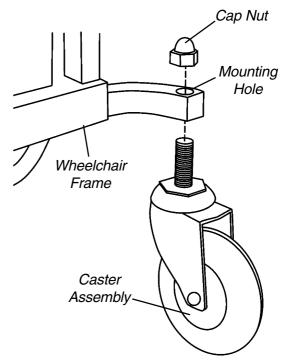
REPLACING THE FRONT/REAR CASTER ASSEMBLIES
